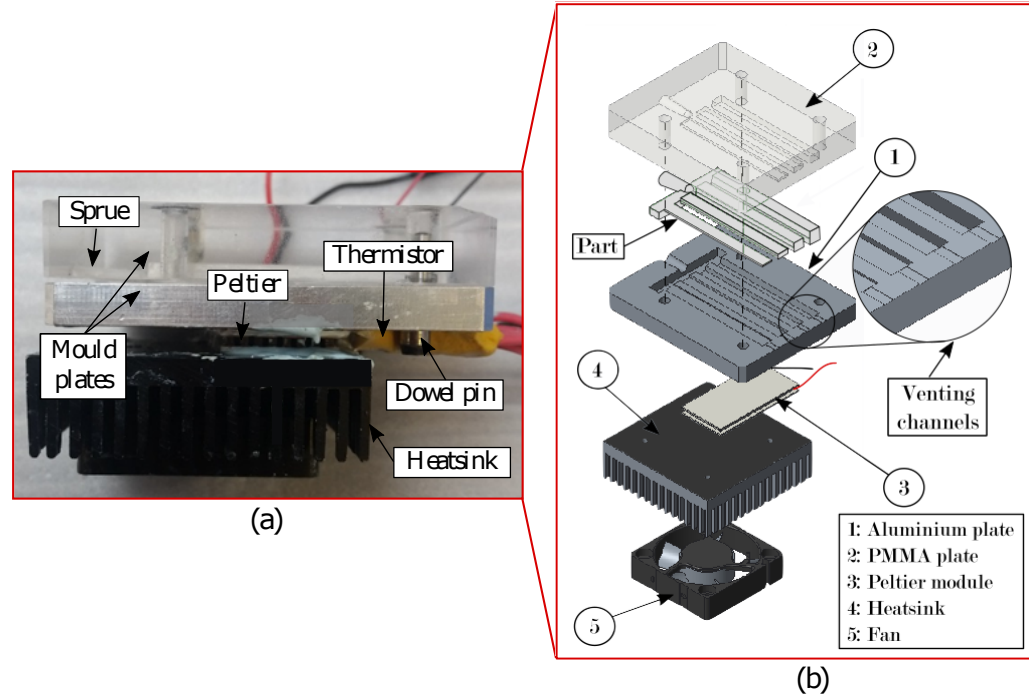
Parallel-channels* mould. (a) Picture of the assembly. (b) Exploded view.
